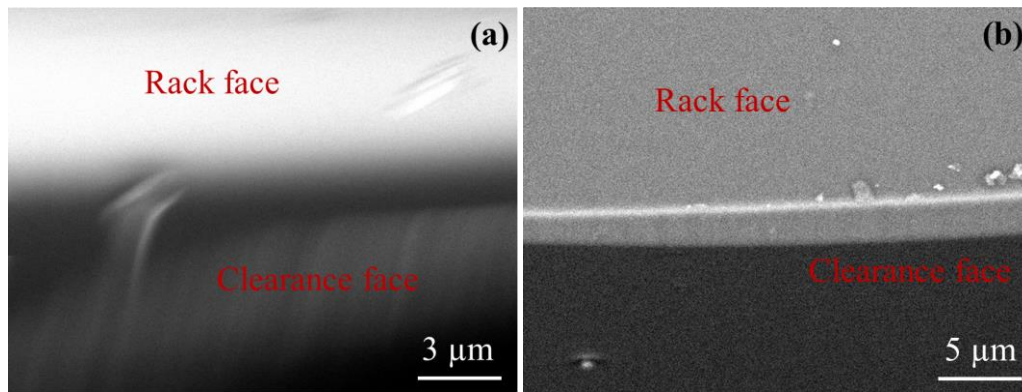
Tool clearance face for (a) sculpturing and (b) fly cutting.
